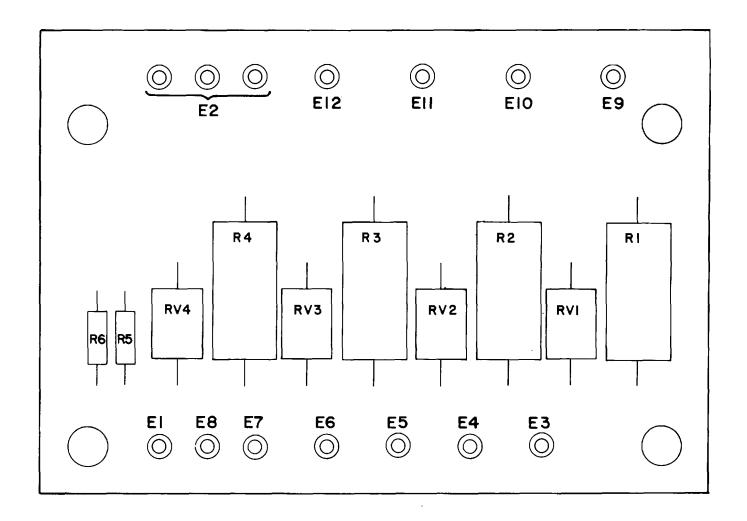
Voltage Surge Suppressor Circuit Card Assembly, 1A2A6
